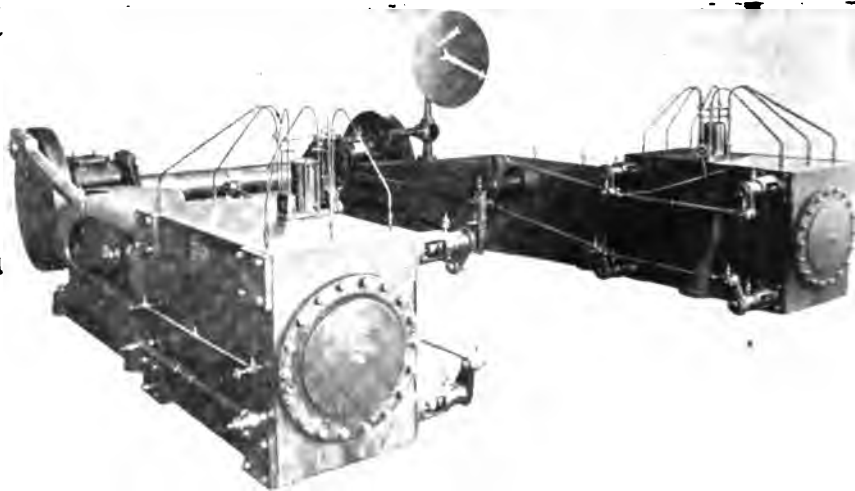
SEC. 10NN.—Sextuple feed Rochester automatic lubricators attached to a pair of four-valve hoisting engines.
